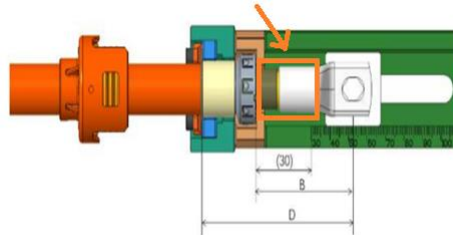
View of the bundle after installing and shrinking the heat shrink tube
